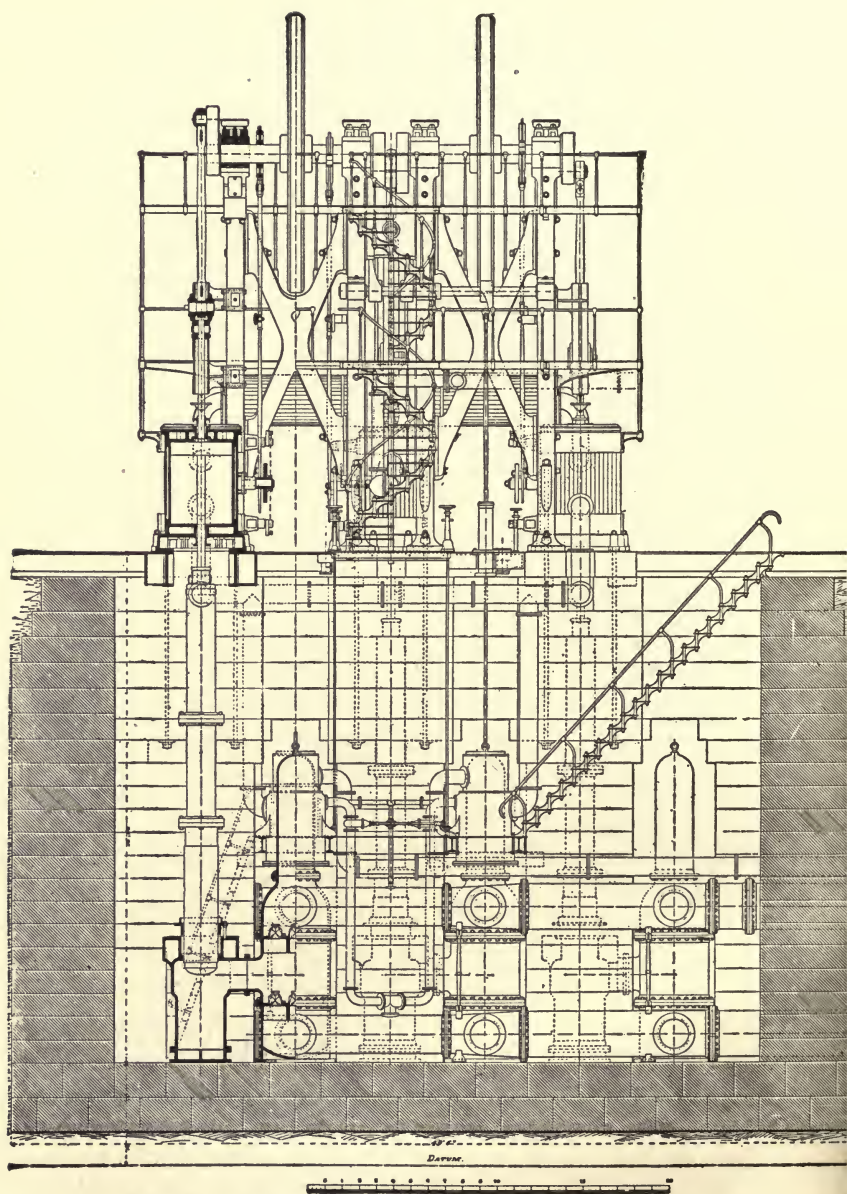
Reynolds Three Cylinder Compound Pumping Engine.
